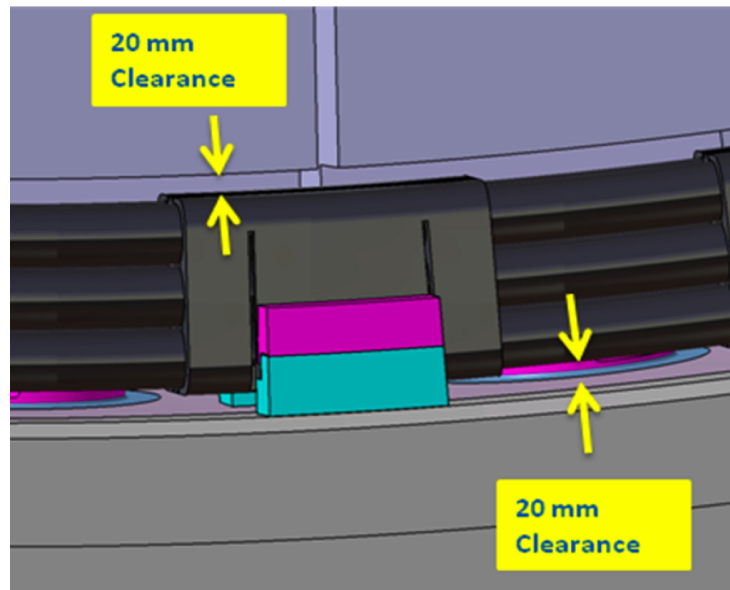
Clearance Between IVCs and Blanket Shield Module Cut-Outs
